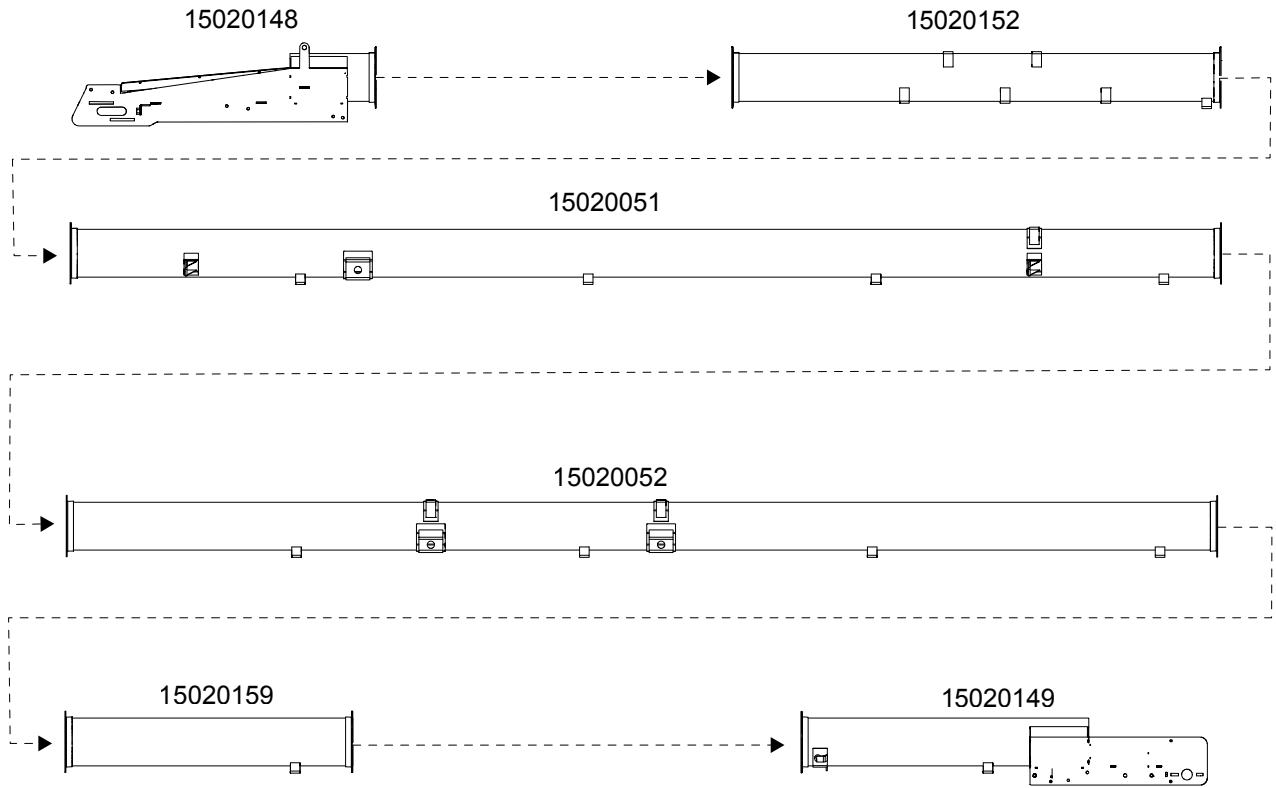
Conveyor Tube Layout for 1575 Model (Batco & Westfield)
